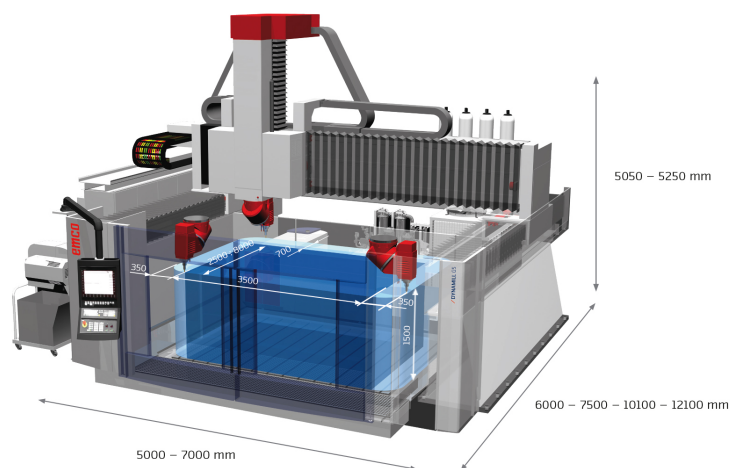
Overall dimensions & Working Envelope of the Gantry Milling Machine Dynamill G5
